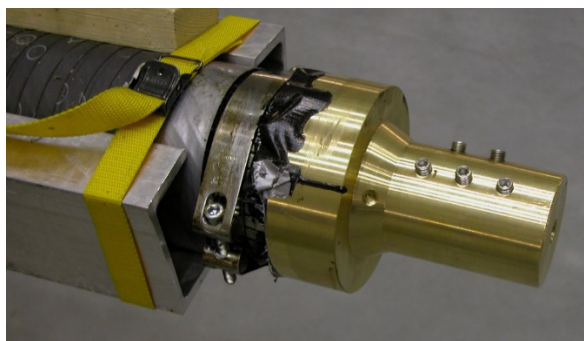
One of the end caps after gluing, but before removing the U-shaped aluminum supporting bars. The threaded hole for the pressure sensor brass socket is seen at the slanting surface.
